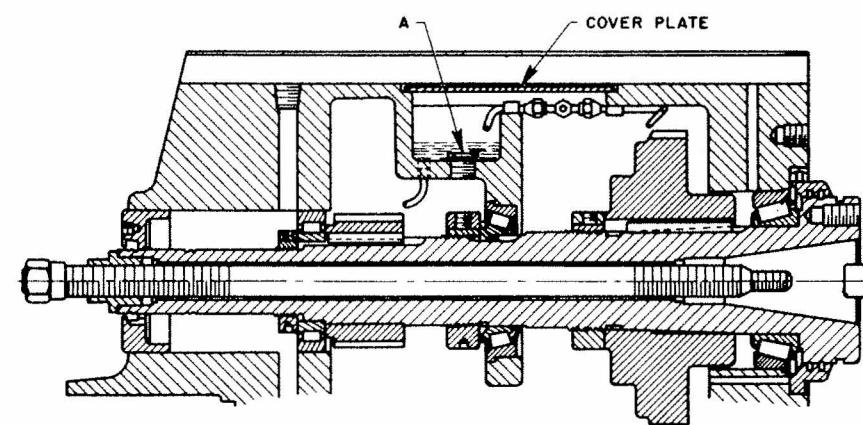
Illustration of power train of a plain knee-and-column-type milling machine.
